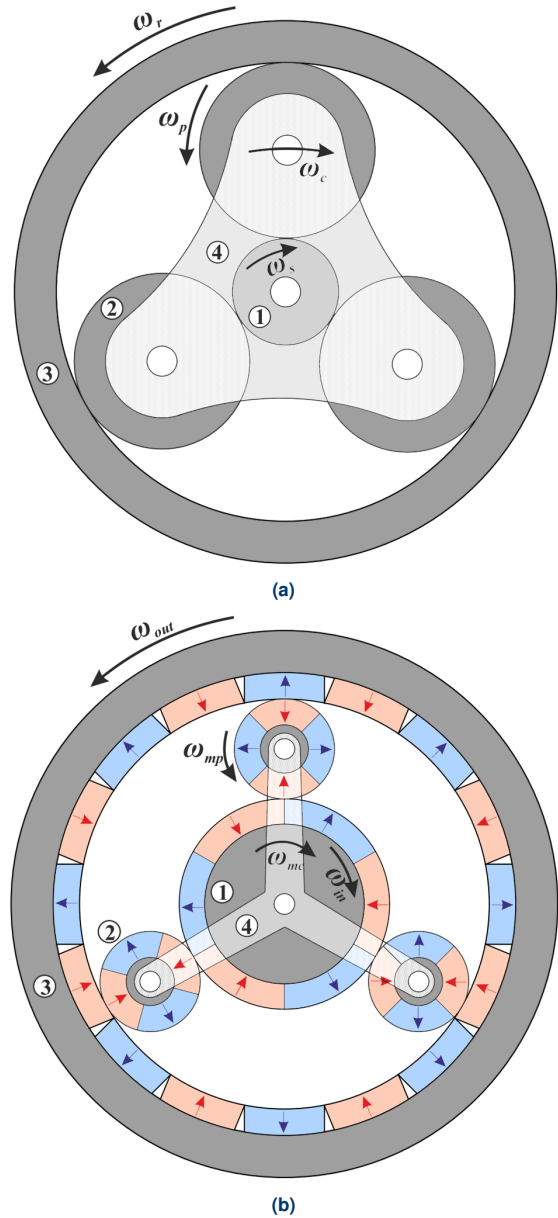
The key elements (1) sun gear, (2) planet gear, (3) ring gear, (4) planet carrier in (a) mechanical, (b) magnetic gear case
